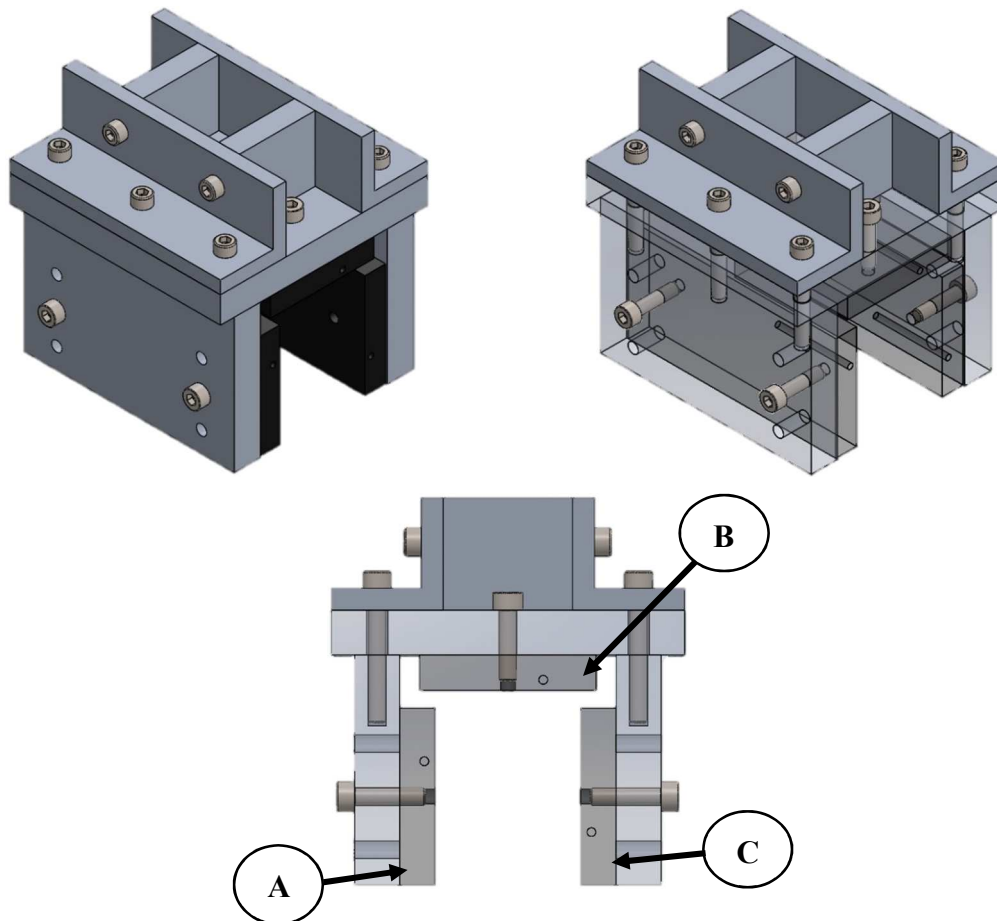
Linear bearing test rig c shaped supporting clamp with installed bearing samples. Arrows indicate order and placement of bearing sample pads
